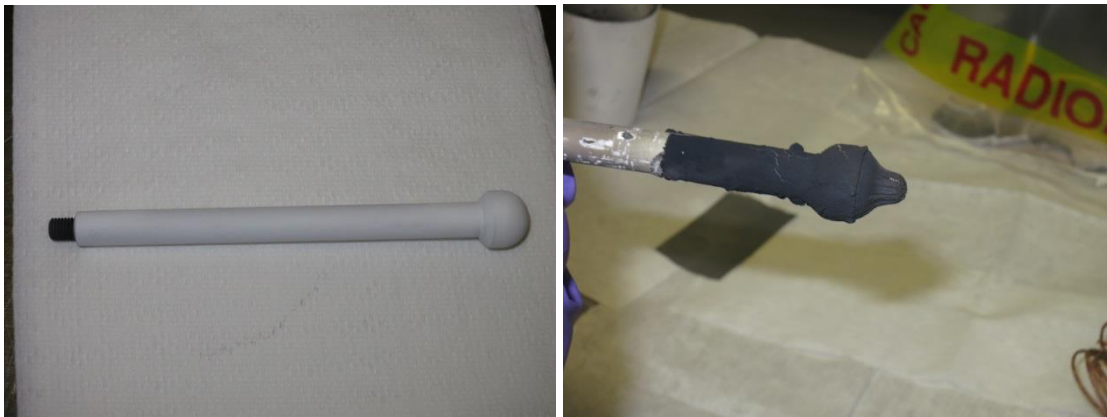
Final design of stopper rod (left). Used stopper rod after a casting (right).
